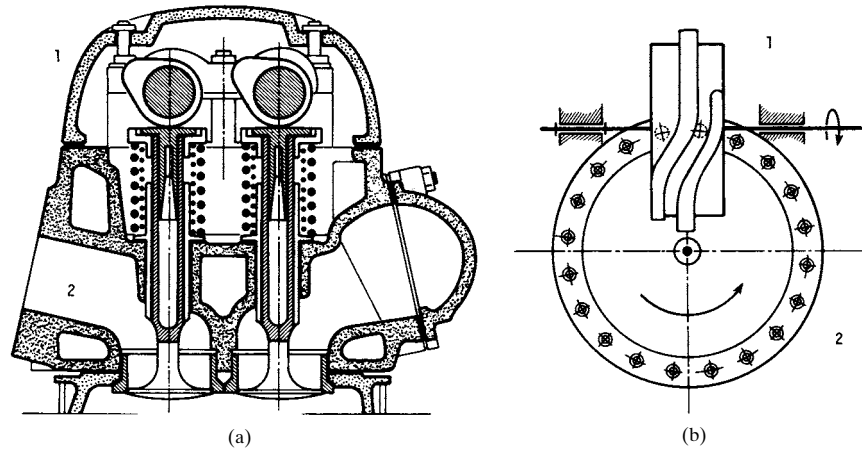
(a) Planar cam mechanism of the internal-combustion-engine D-R-D-R type; (b) spatial cam mechanism of the 16-mm film projector R-D-R type.
